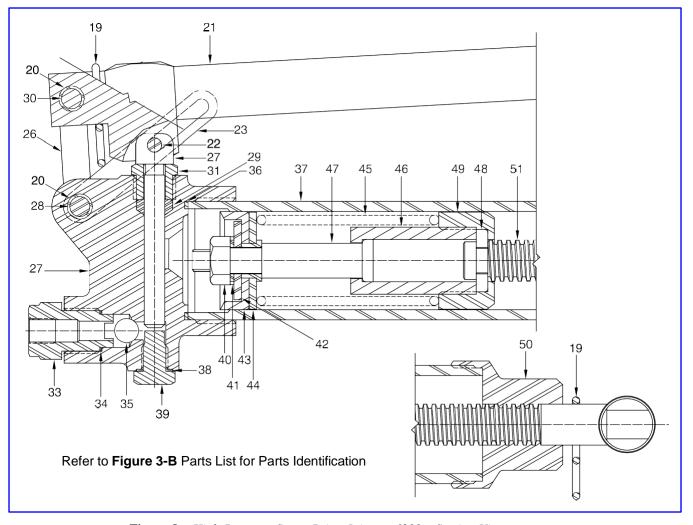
High-Pressure Screw Prime Injector 6299 - Section View
